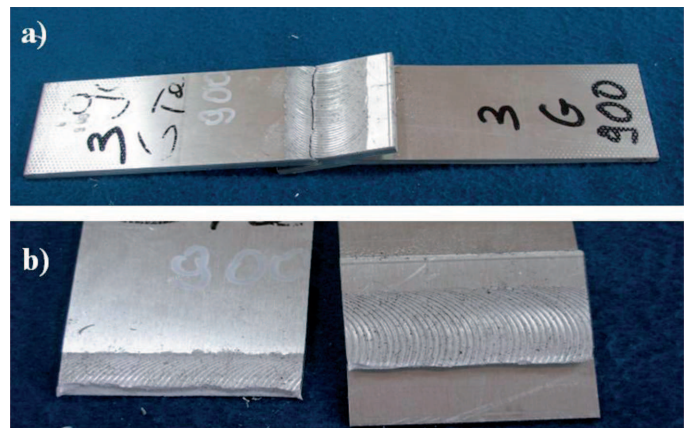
Fractures of lap joint Triflute tool welded with linear welding speed of 900 mm/min; a) main view; b) surface view at the place of fracture on advancing side of joint
